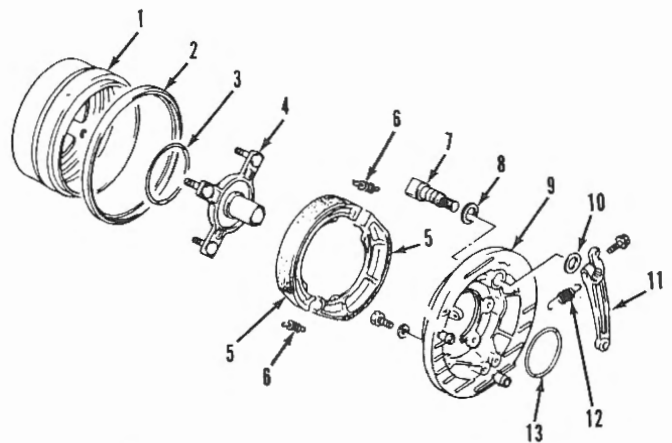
Exploded view of rear brake components used on all models except LT-F4WDX.
